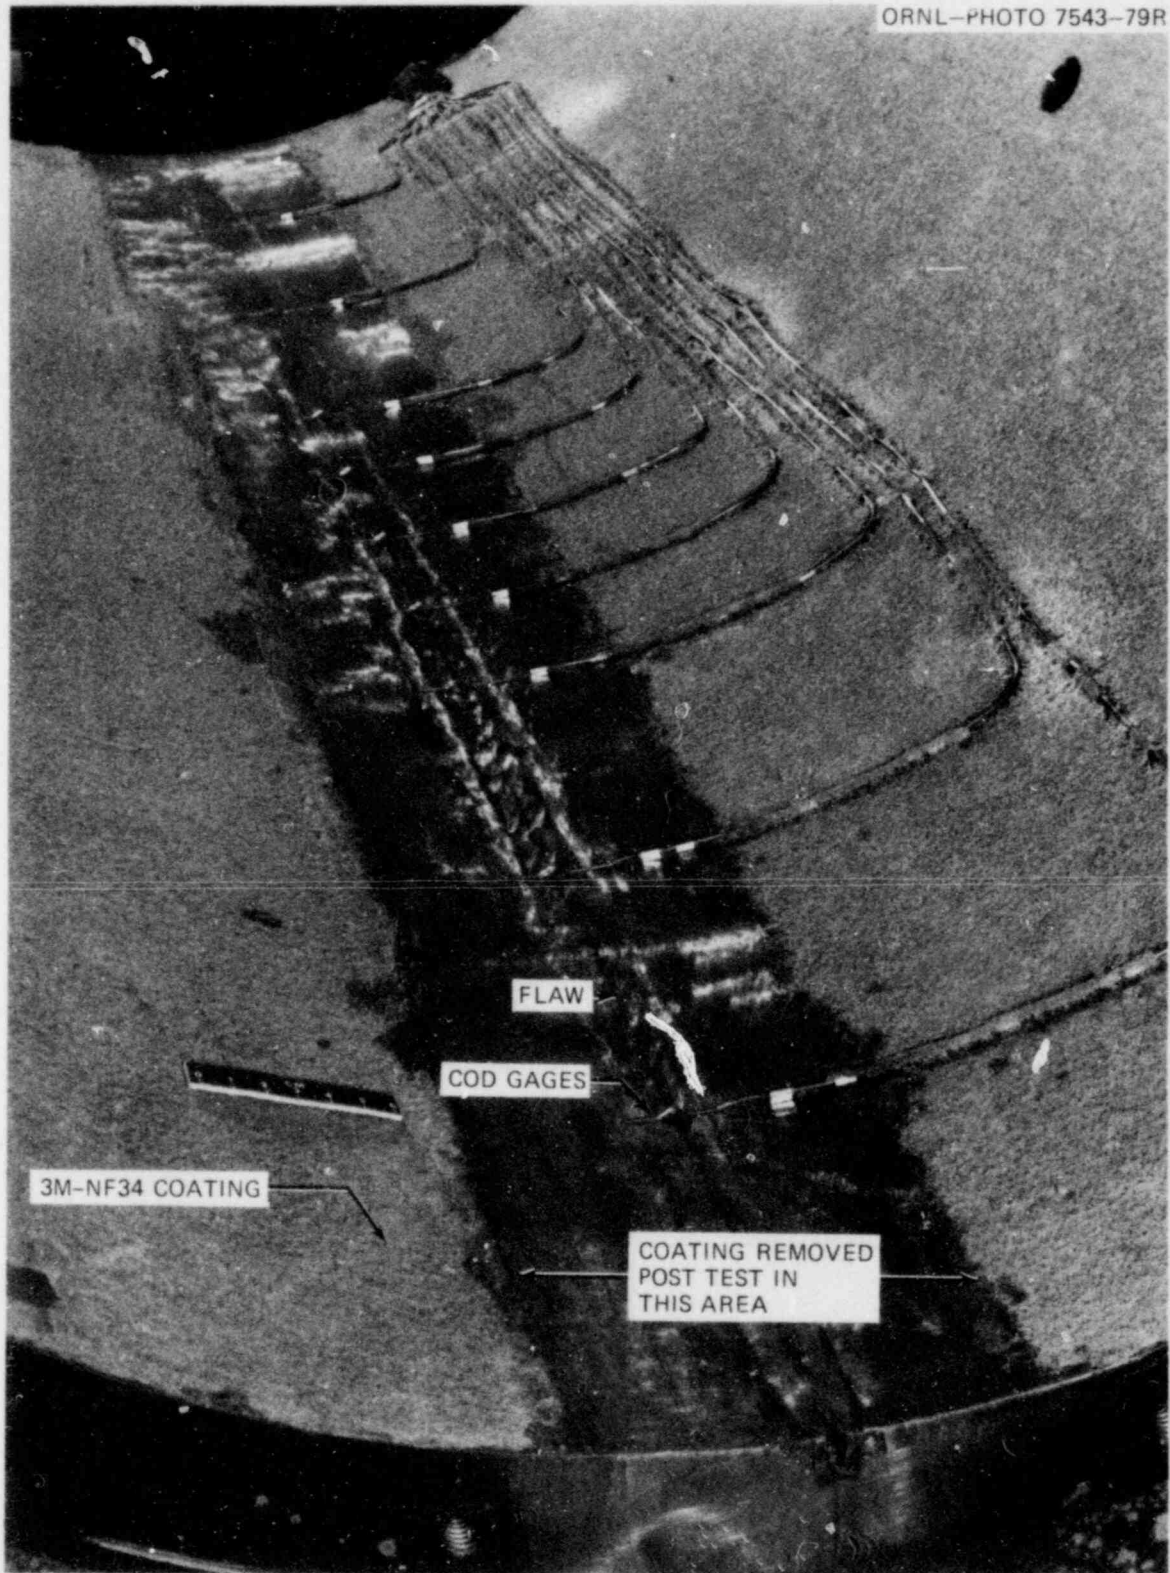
View of interior of TSC-1 following TSE-5 showing the long axial flaw and COD gages.
